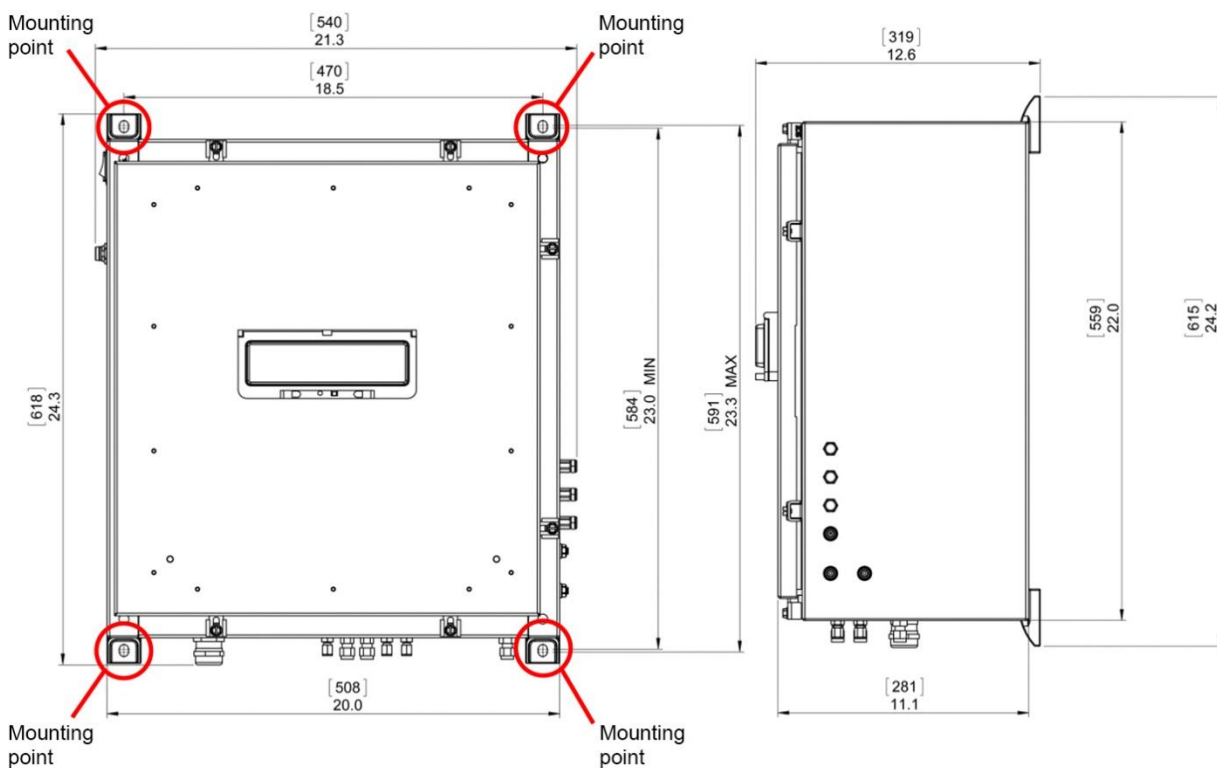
On-Line THM Analyzer mounting dimensions
